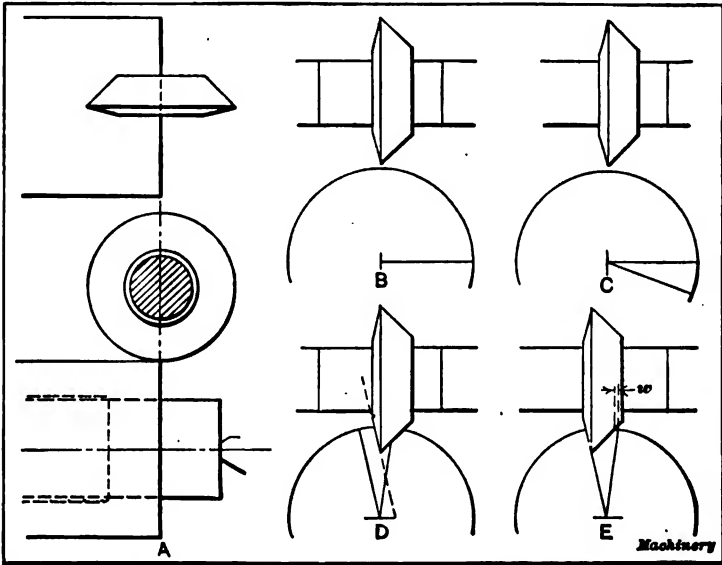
Setting a Double-angle Cutter for Milling Teeth of a Spiral Mill
